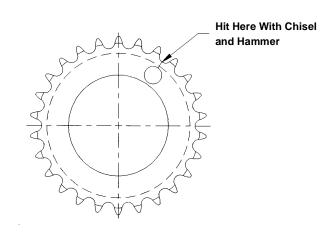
CRANKSHAFT CHAIN SPROCKET - TYPICAL
